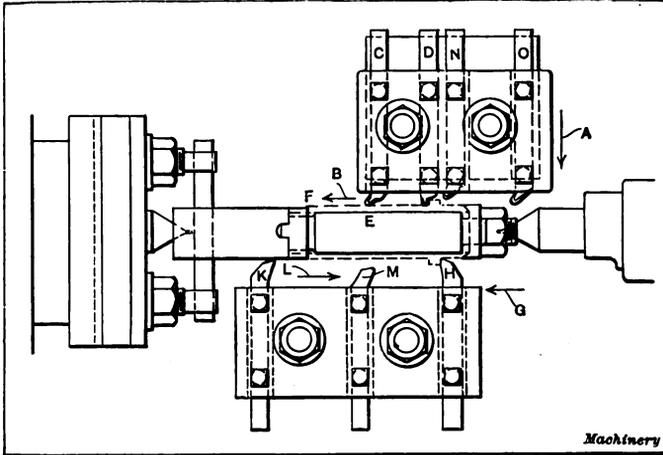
Tool Arrangement for turning Half-bushings shown in Fig. 3
